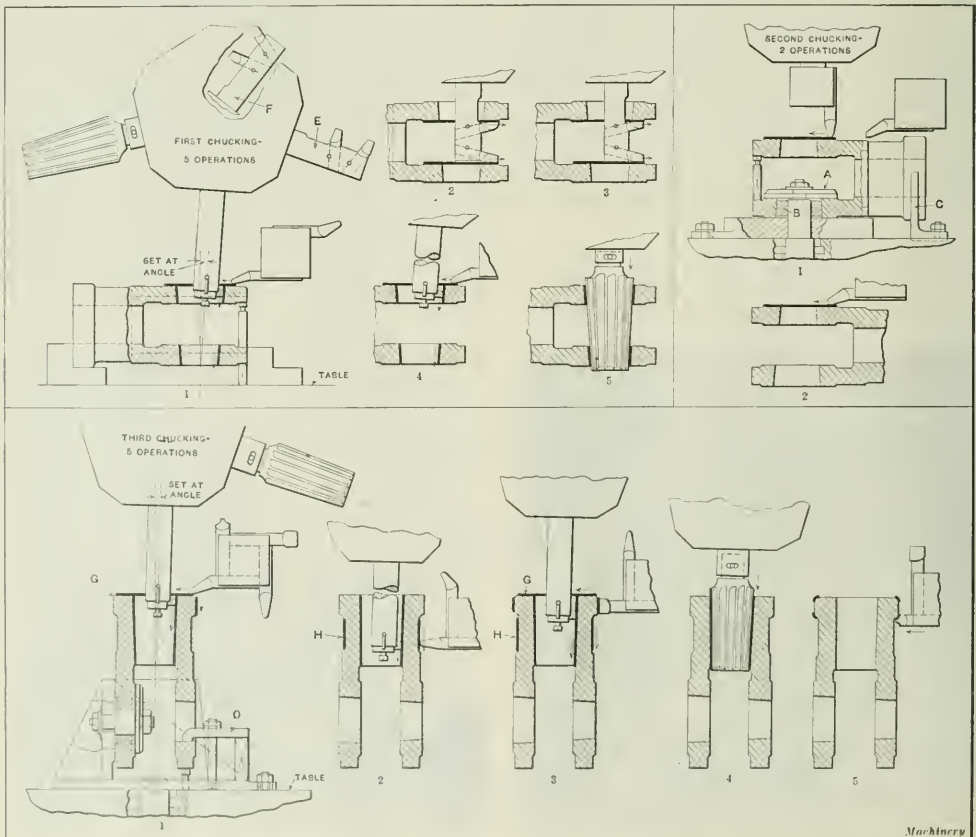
Machining a Locomotive Cross-head in Three Chuckings on the Vertical Turret Lathe
